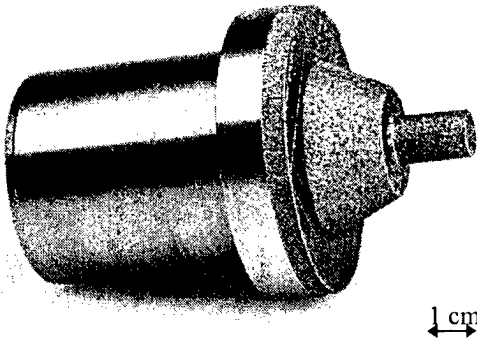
Slider for a die casting tool manufactured out of 1.2343 by SLPR.
